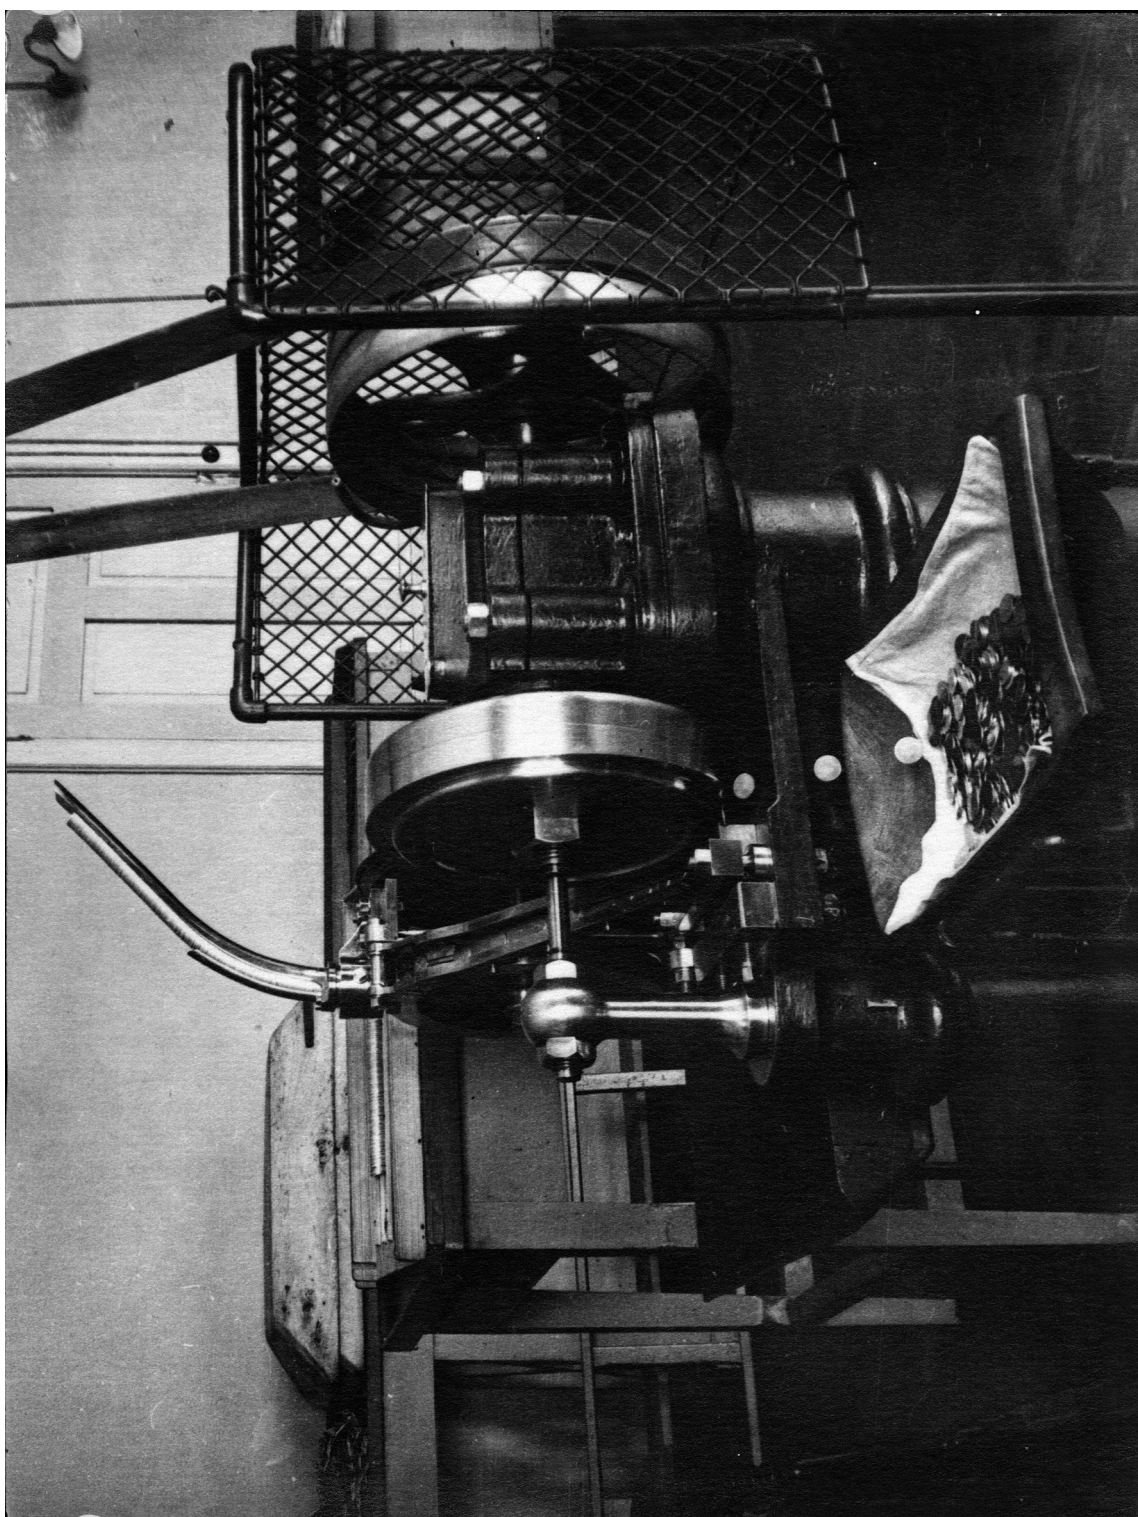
Probably the milling machine built at the mint in Hamburg 1875.
